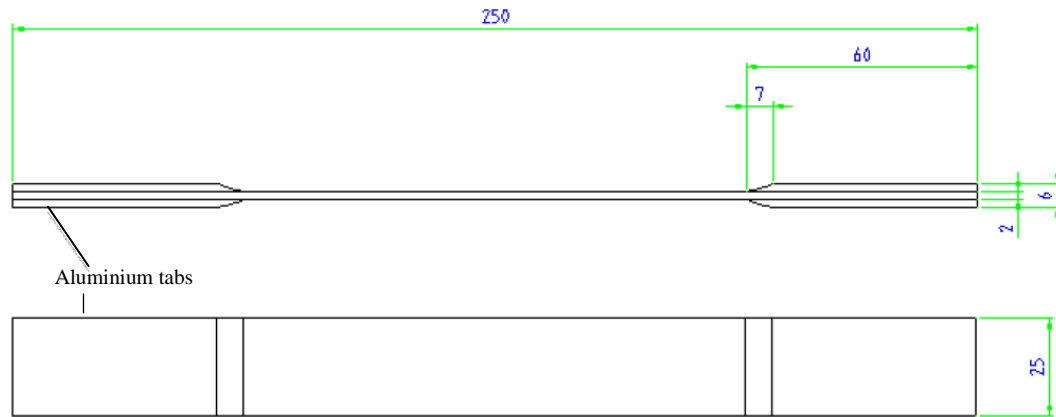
(Coupon dimension for tensile testing. All dimensions given in mm)
